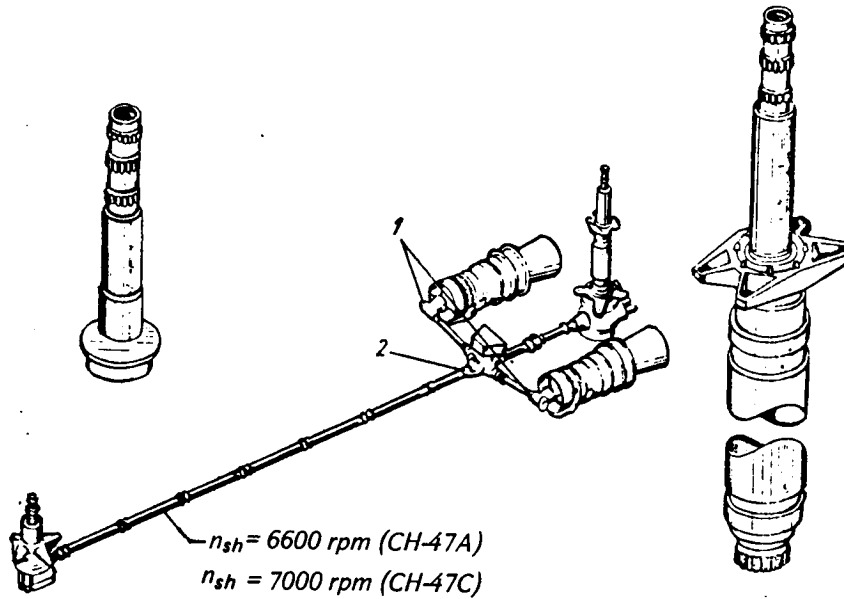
Transmission of the Chinook helicopter: (1) intermediate gearboxes (engine gearboxes); and (2) intermediate or combining gearbox
